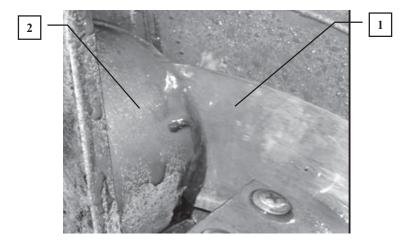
Cutting a monocrystal (1) by a diamond cutting saw (2) which is rotating without contacting the machine mechanically
